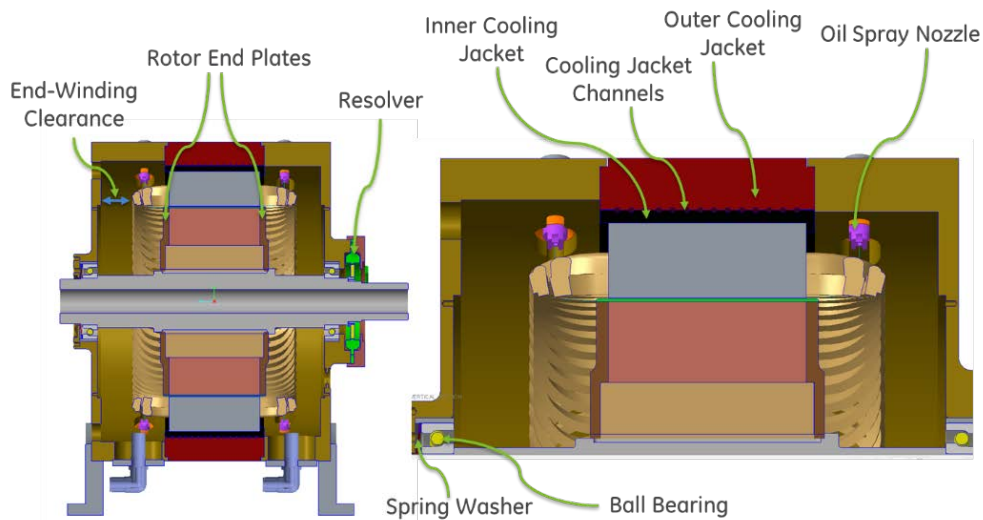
Salient Motor Features Horizontal Cross-Section
